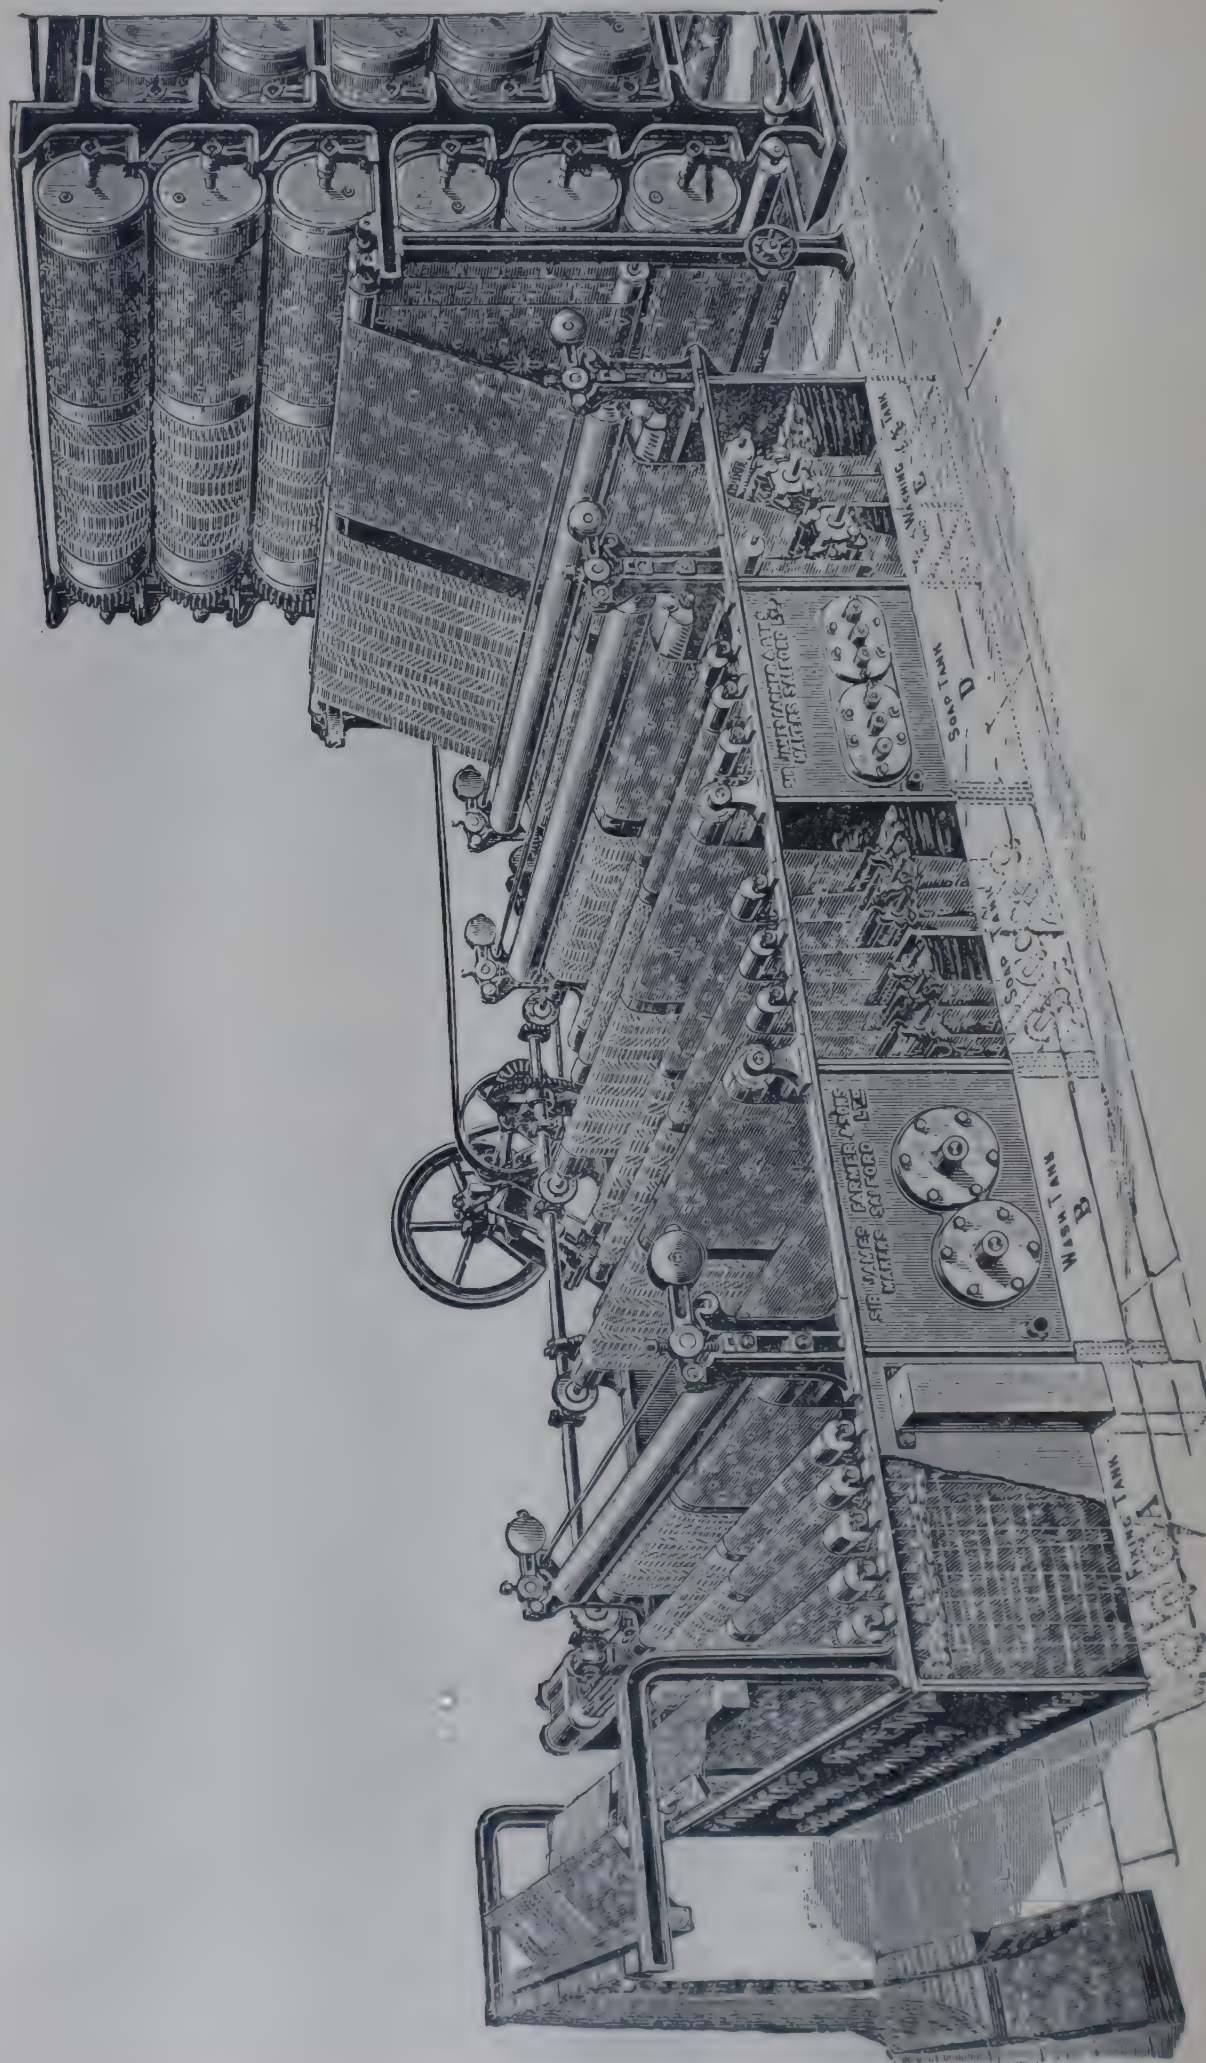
Washing Machine and Vertical Drying Machine. (Farmer.)
